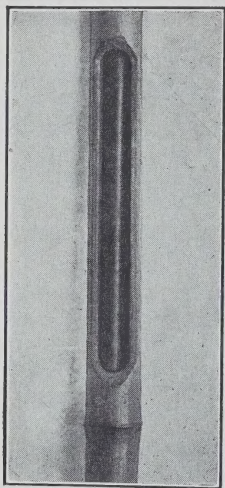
Bamboo Rod with Section Cut Out to Show the Pipe which Lines the Rod.
